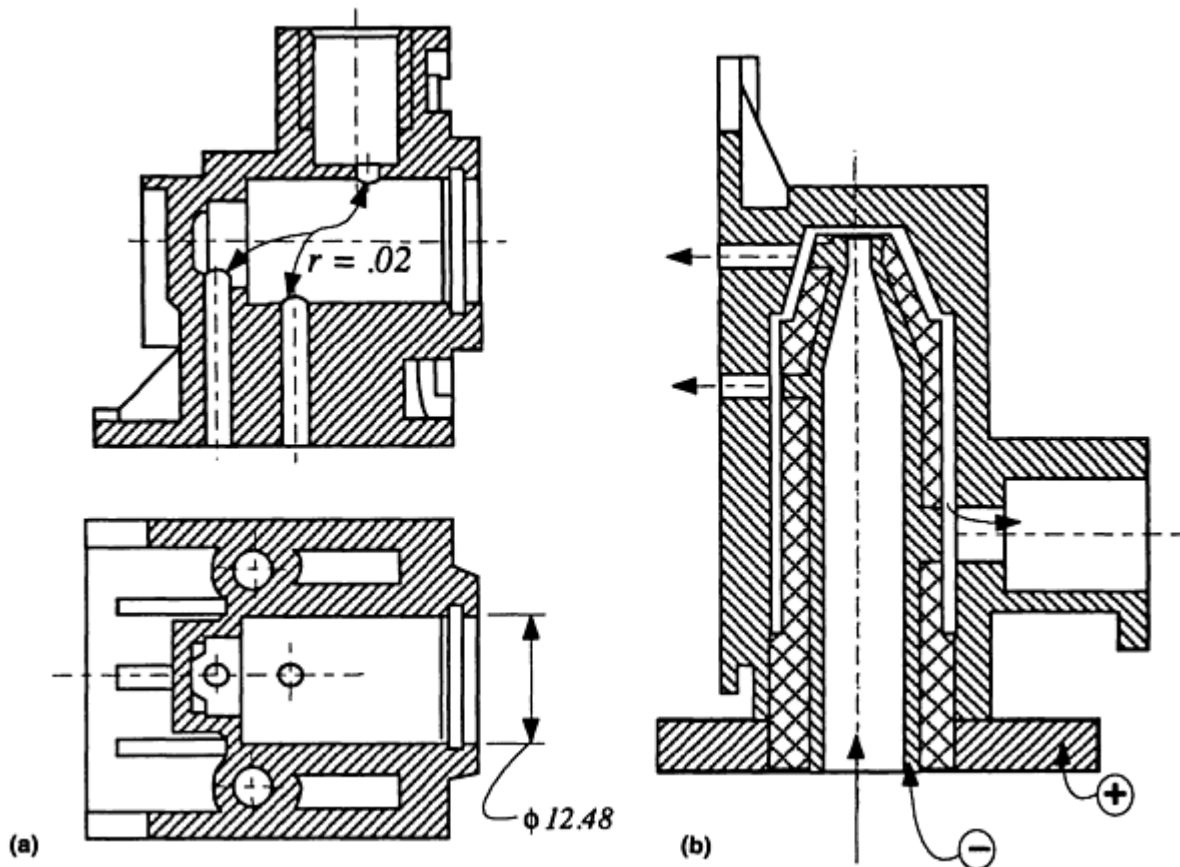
Tooling for electrochemical machining deburring. (a) Valve casing. (b) A fragmentary schematic of the production jig. Machining parameters: 15% water solution of NaNO_3 ; U (in Fig. 2) = 15 V; machining time, 8 s; electrolyte pressure, 1 MPa; maximum current per piece, 20 A
